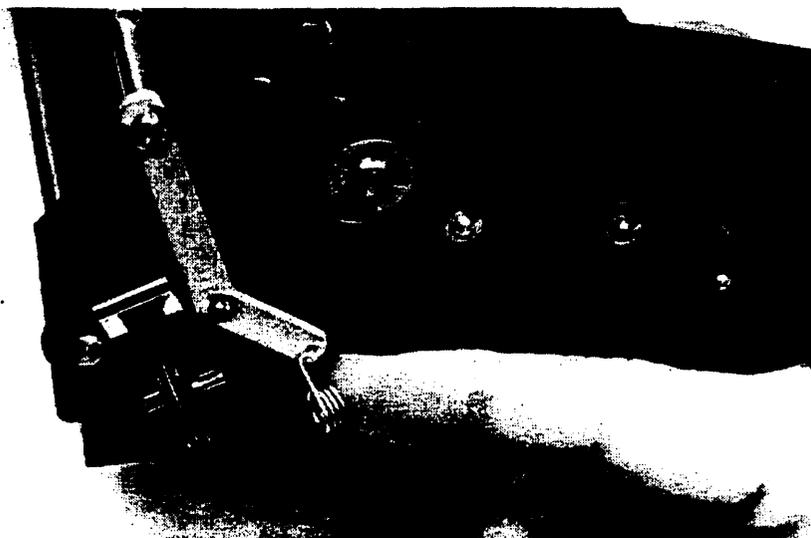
Bail-Arm Removal—Spring in Outward Position
